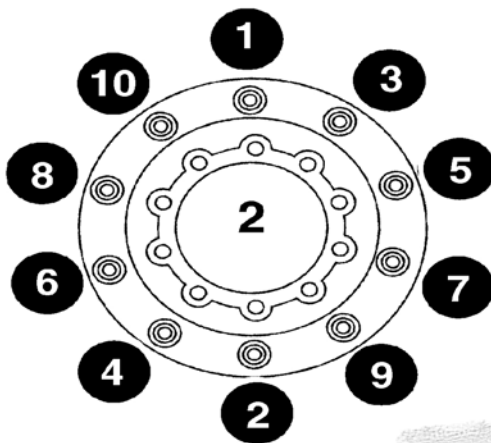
Rear Axle Lower Bolts Torque Wrench Orientation
